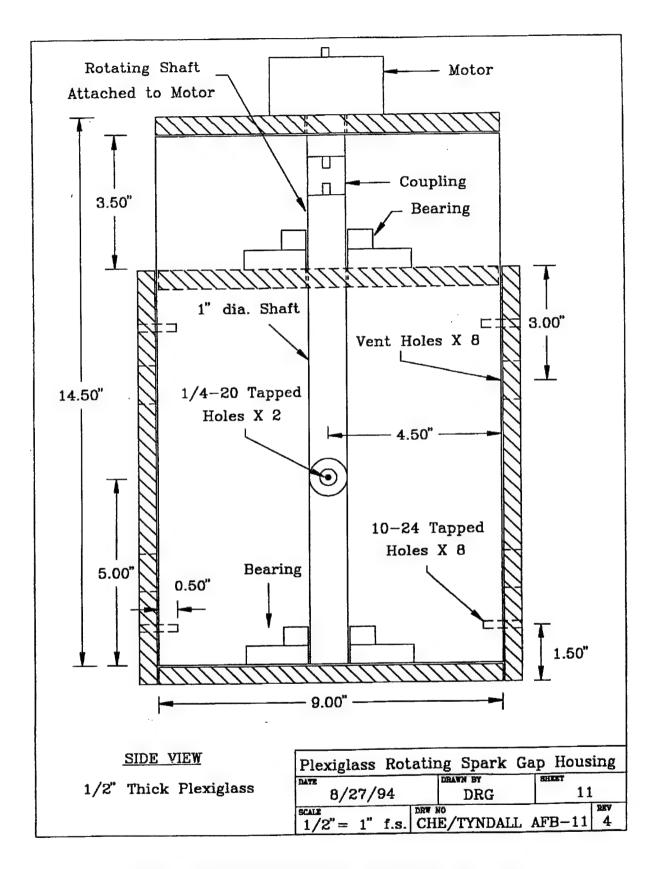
Plexiglas Rotating Spark Gap Housing - Side View
